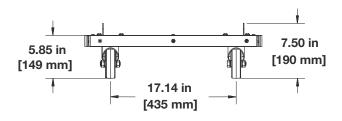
MCF-750 Caster Frame (for cabinets with rigging) Dimensions
